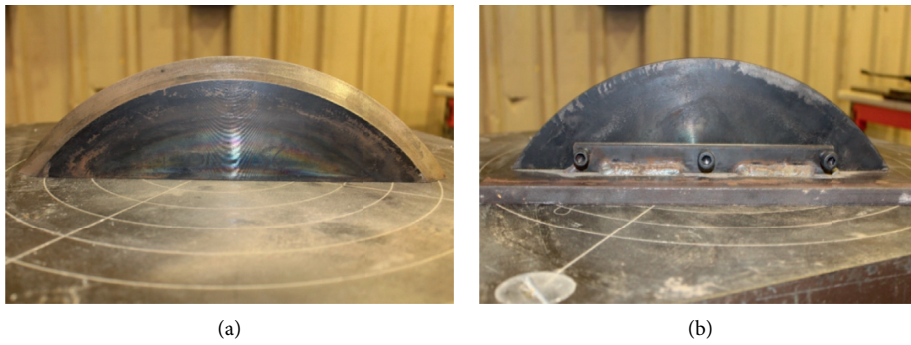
Fabricated cutters: the V shape one (a) and CCS one (b).
